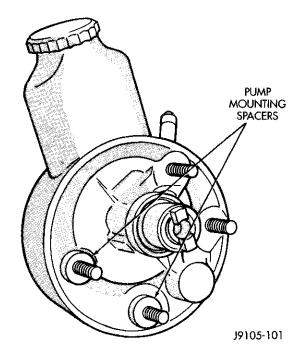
Steering Pump Mounting Stud Spacer Locations
